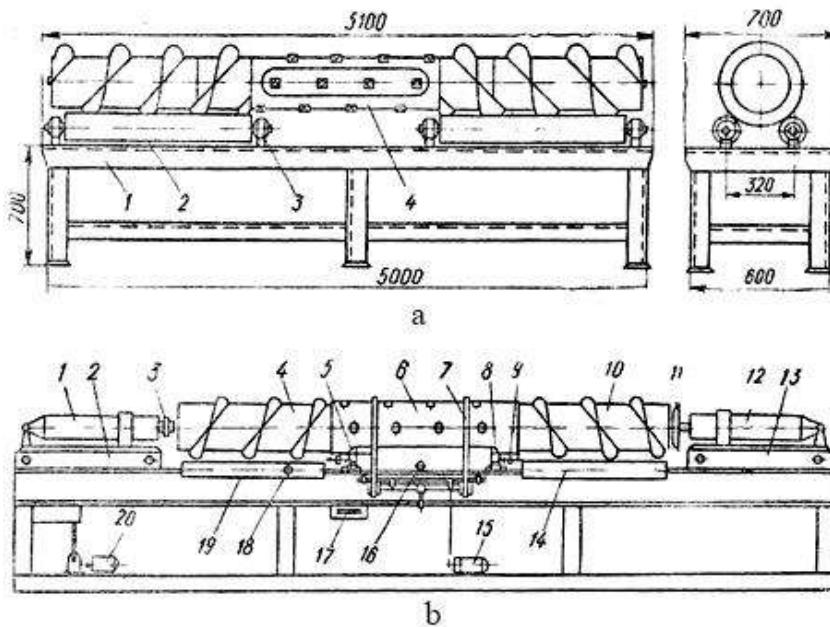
Equipment to restore reaper screw conveyors of combine harvesters: a – rotator of reaper screw conveyor: 1 – frame; 2 – rolling mill; 3 – bearing; 4 – reaper screw conveyor; b – stand scheme to press in outer tubes of reaper screw conveyors of combine harvesters:
